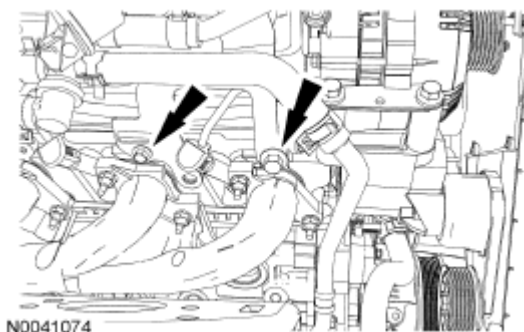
Locating Heater Hose Tube Bracket Bolts
